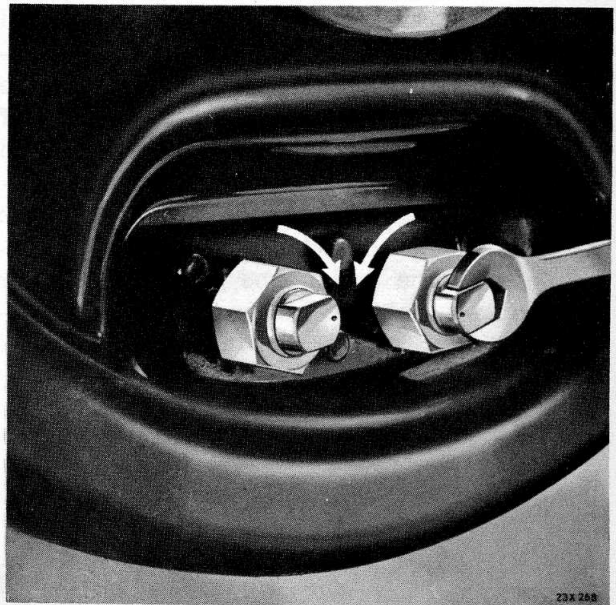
Brake Shoe Anchor Bolt Adjustment
